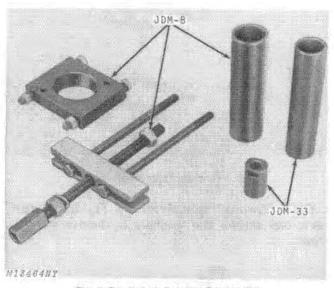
Crankshaft Bearing Service Set and Bearing Tool Adapter Kit
